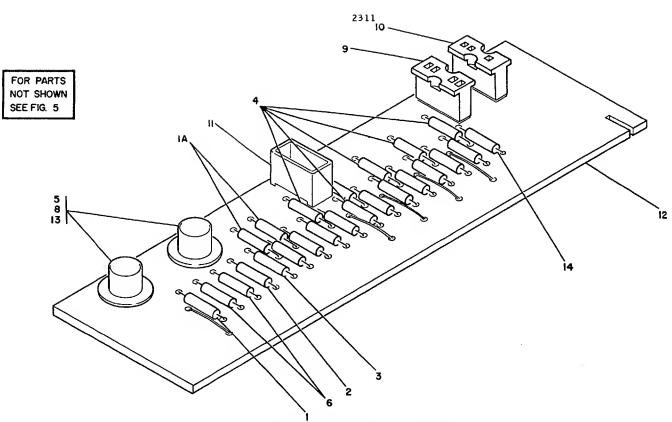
WRITE	DRIVER	CARO	ASSEMBLY.	SFE	LIST	15.
